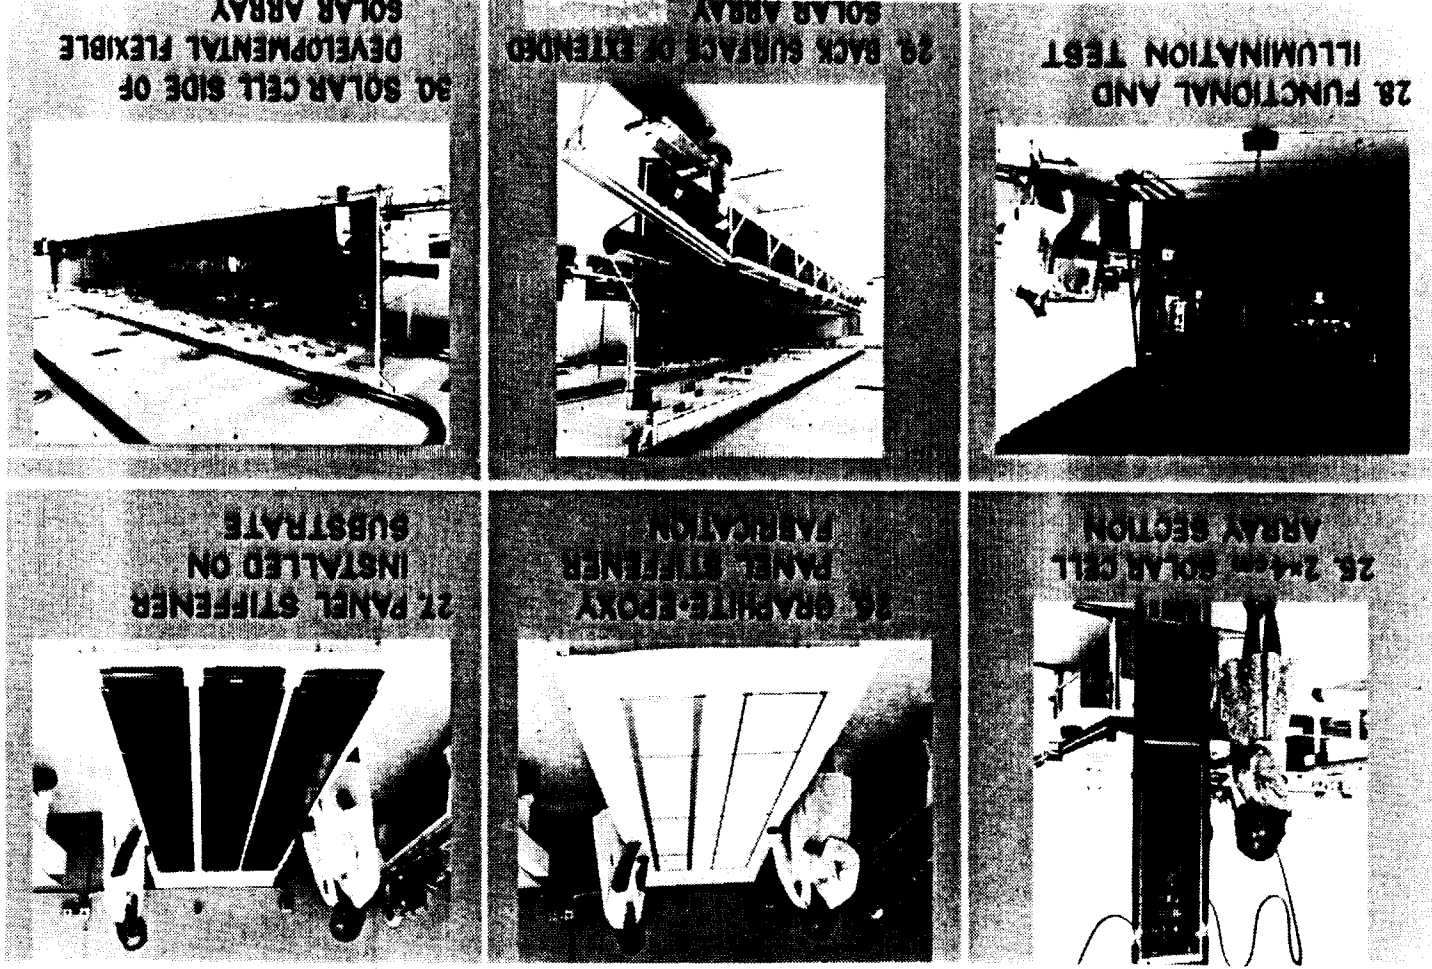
Fabrication, Assembly, and Test of SAE Wing (cont.)
